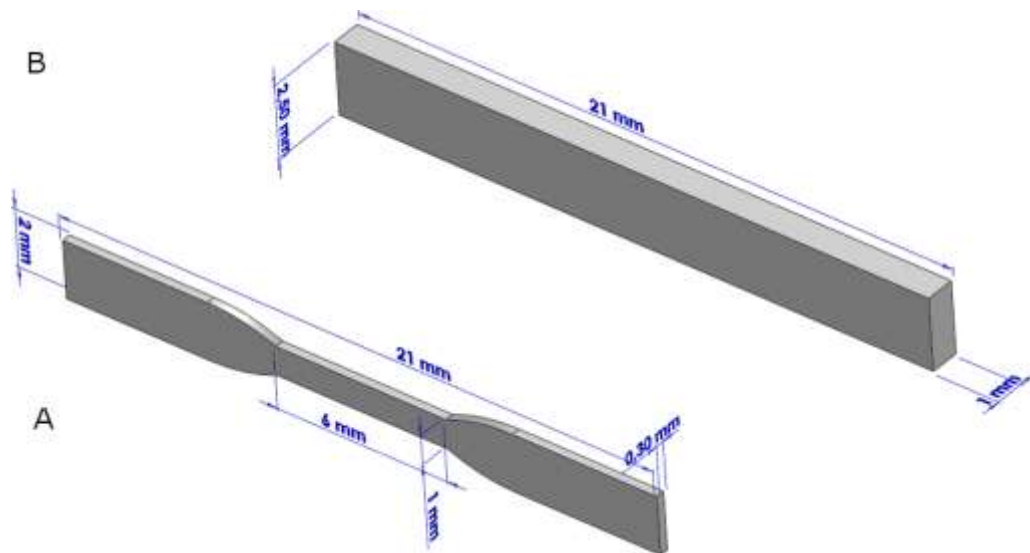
Nominal dimensions of tensile (A) and parallelepipedic (B) specimens.
